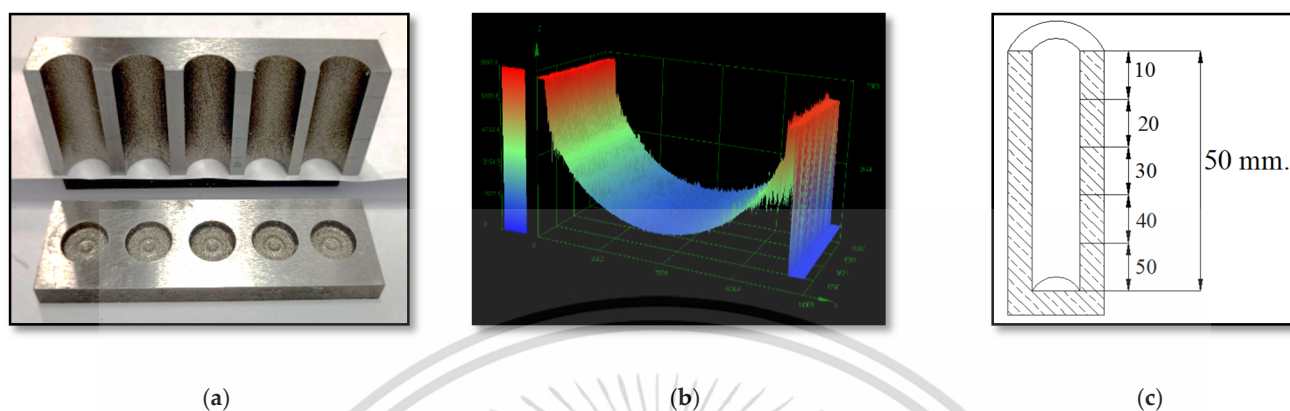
The gap clearance profiles: (a) dismembered AISI P20 tool steel workpieces, (b) maximum gap clearance (GC) distortion measurement, (c) locations of GC distortion measurement.
